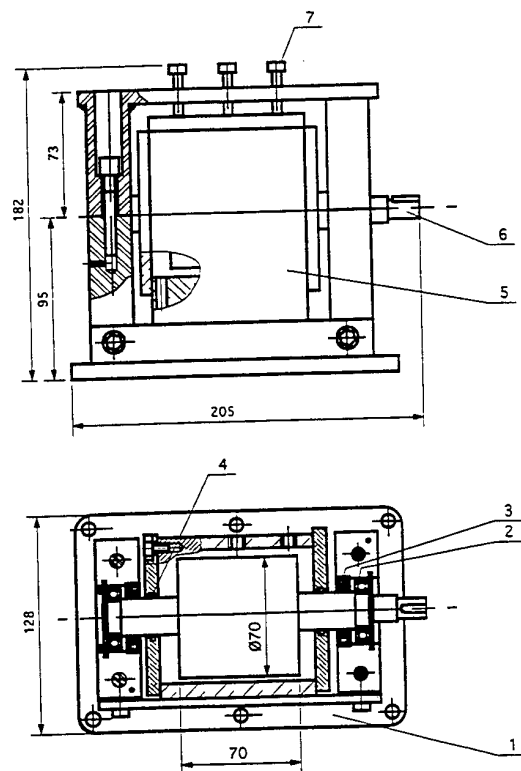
Journal bearing test rig. (1) base, (2) precision ball bearing, (3) and (4) seals, (5) perspex housing, (6) shaft, (7) fastening screws
